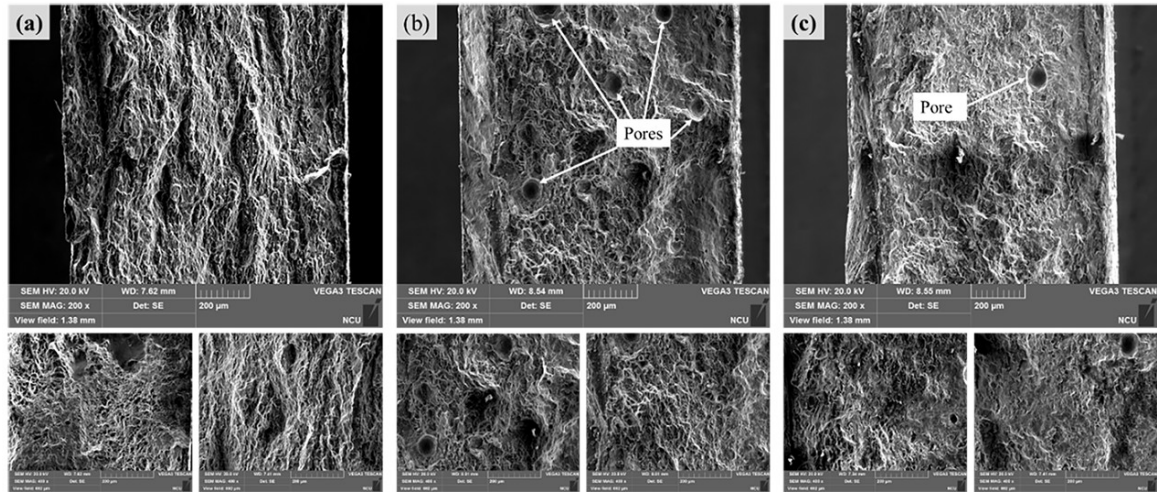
Fracture Surface Morphology:(a) Base Metal,(b) Non-oscillating Welding,(c) Oscillating Welding.
